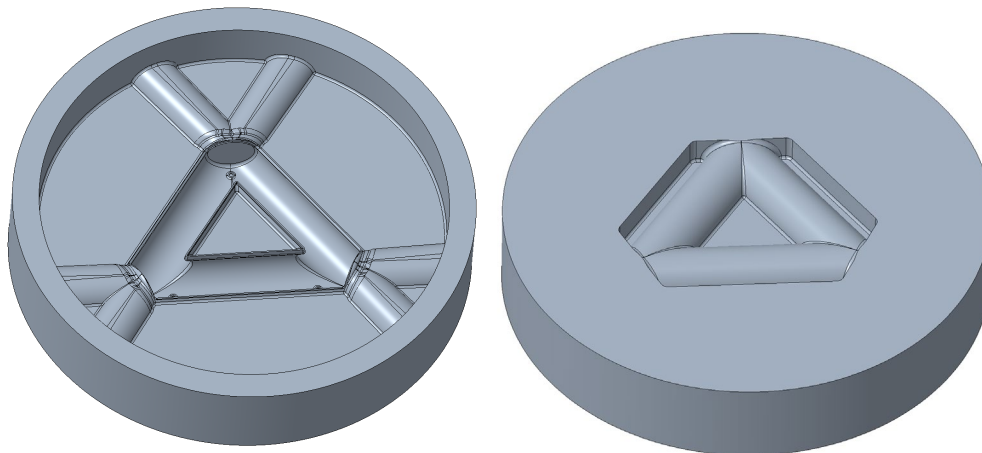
Tube Vacuum Vessel Body machined from Al 6061-T6 forging
